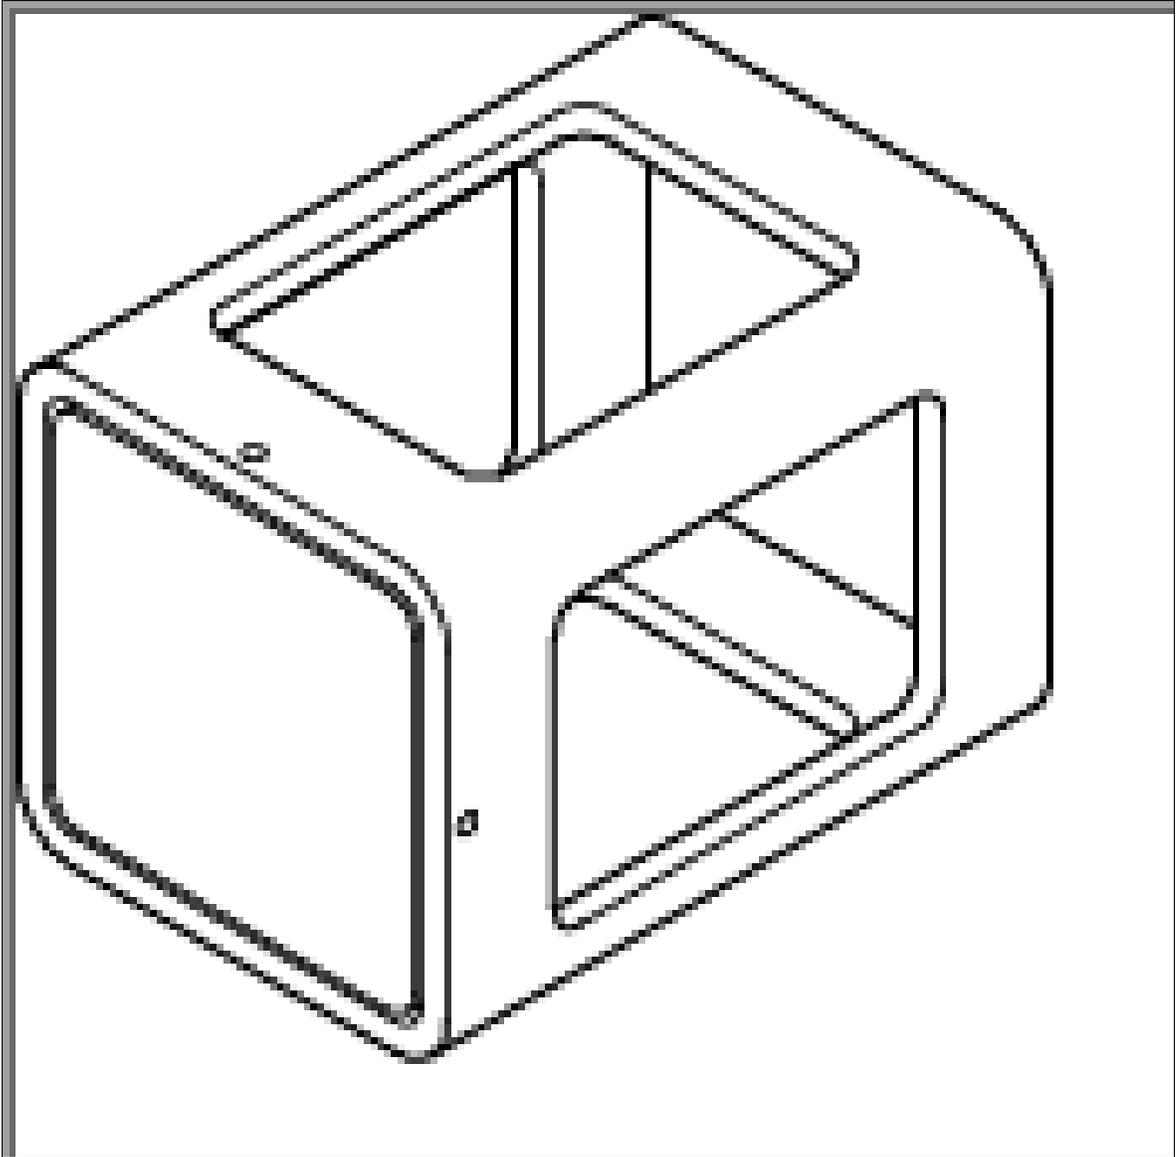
P4 Annulus Drum Assembly, Press Fixture Assembly & Bearing/Gear Splitter
